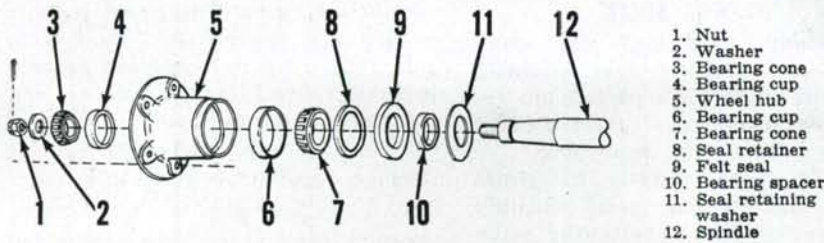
Exploded view of front wheel hub assembly used on dual front wheel tricycle models. Wide front axle models are similar except spacer (10) and washer (11) are not used.
